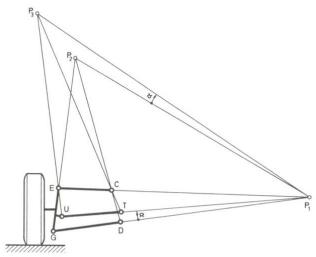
Drafting the joining points of the front running gear. (Kádár, L., Dr. Varga, F., Kőfalusi, P., 2014)
